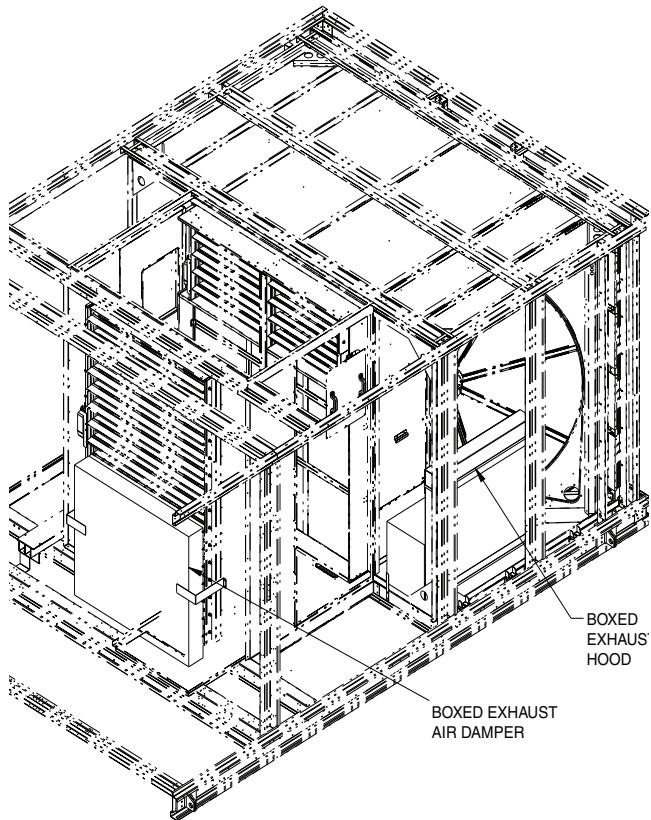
Packaging Location for Exhaust Hood and Exhaust Air Damper
